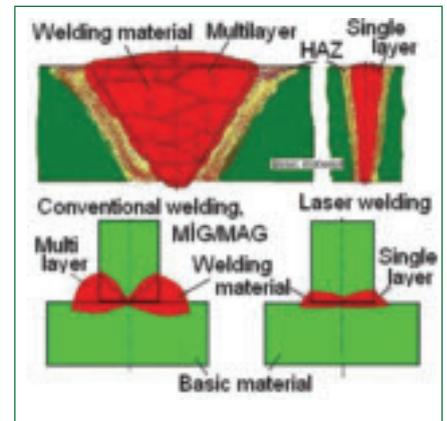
Comparison of joints welded with gas metal arc and laser beam welding.
